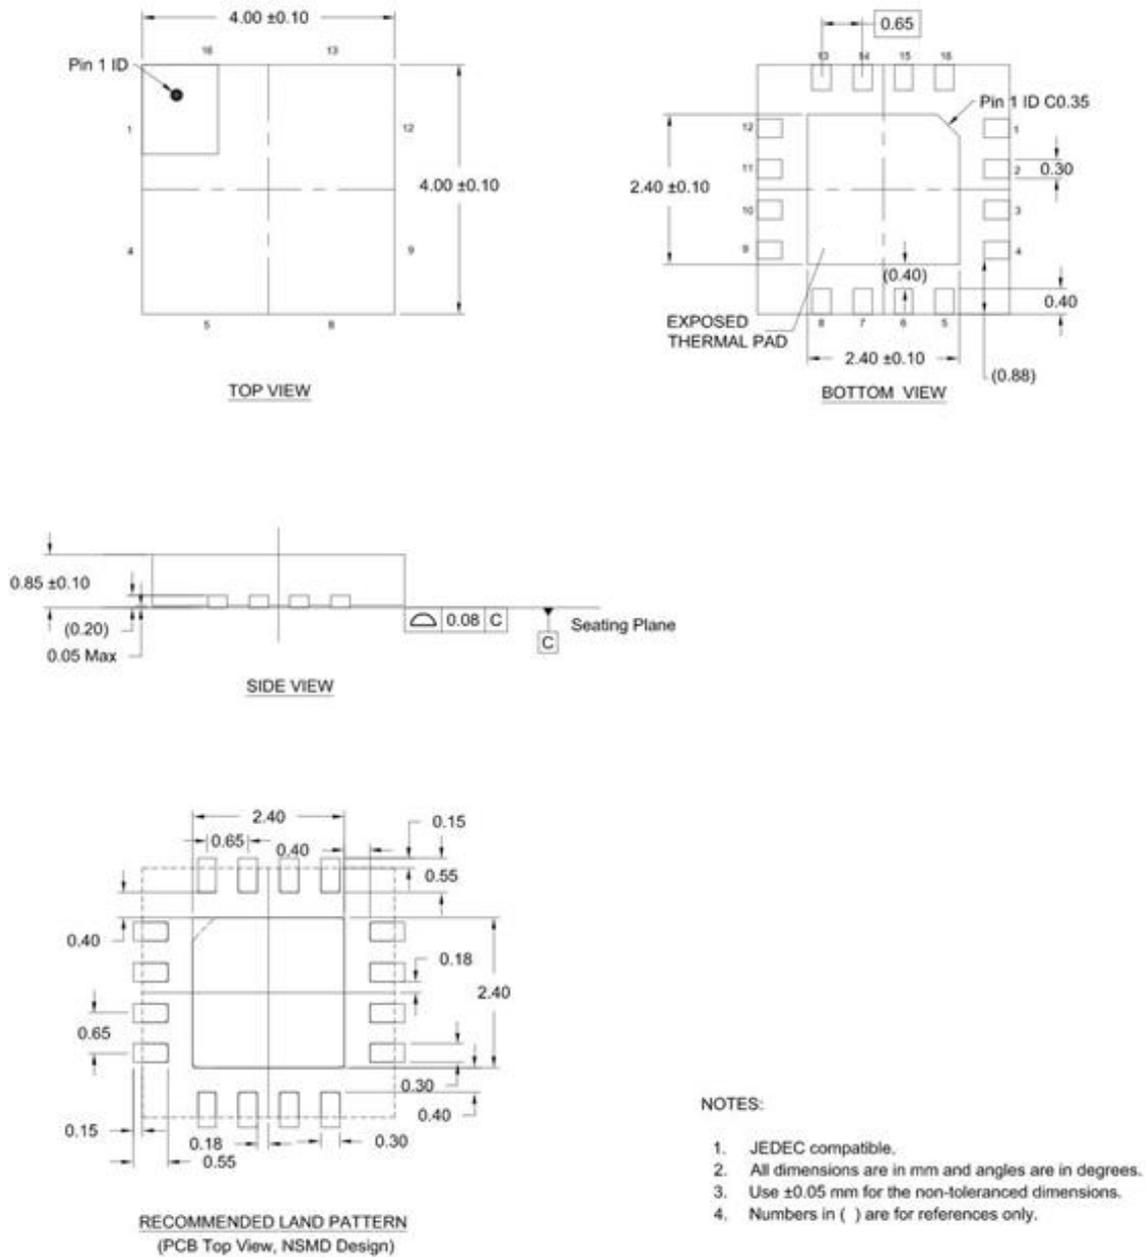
16-Pin QFN (4 mm x 4 mm) Package
